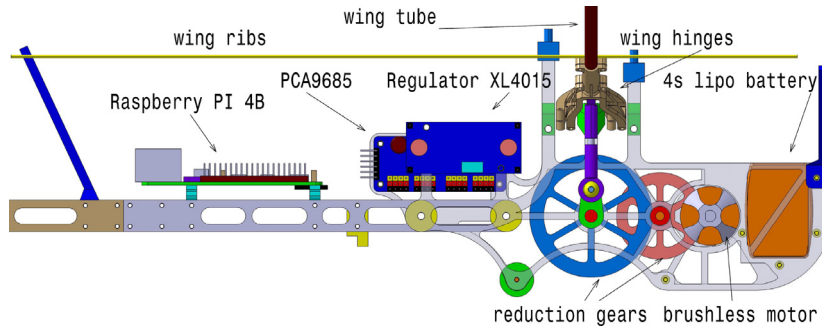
The side view of the CAD design of the flapping-wing flying robot.
